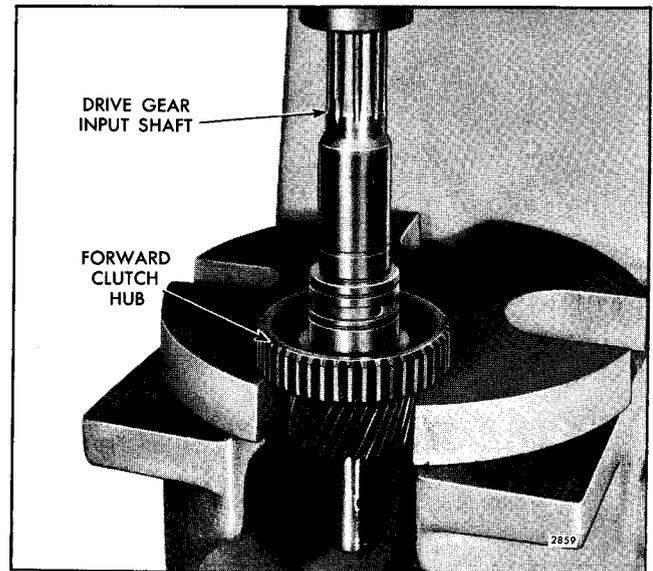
Removing Forward Clutch Hub from Drive Gear Input Shaft
